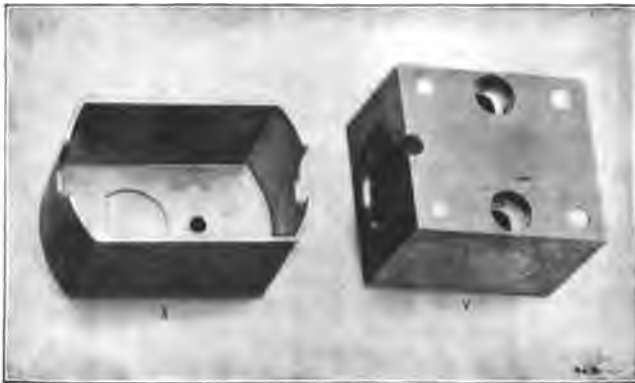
Die-castings illustrating the Extremes of Shrinkage
